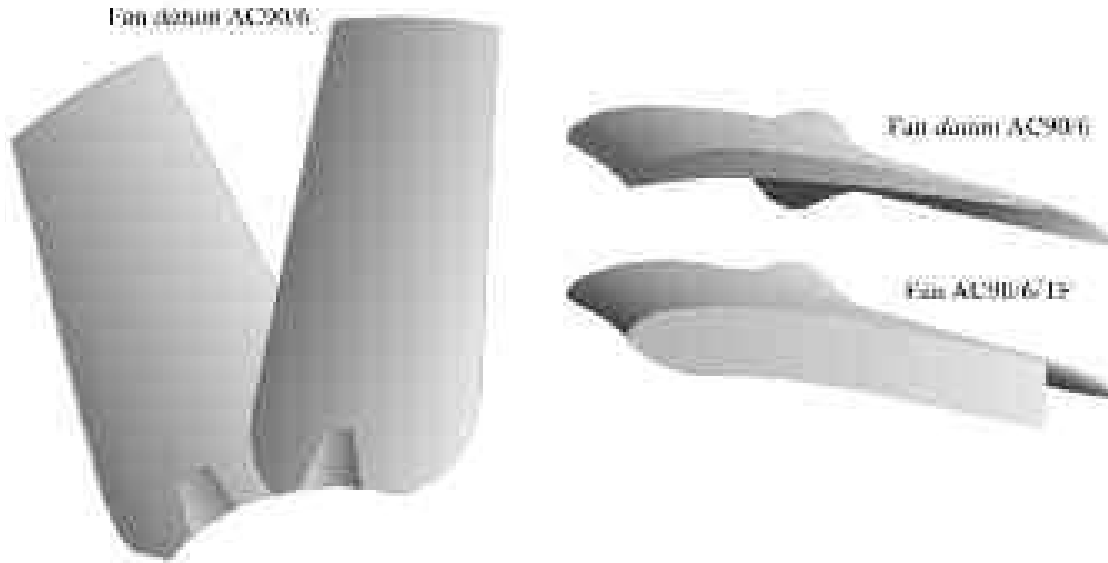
The studied fan *datum* AC90/6 without a fitted blade-tip end-plate and with a constant thickness blade-tip end-plate, AC90/6/TF.
